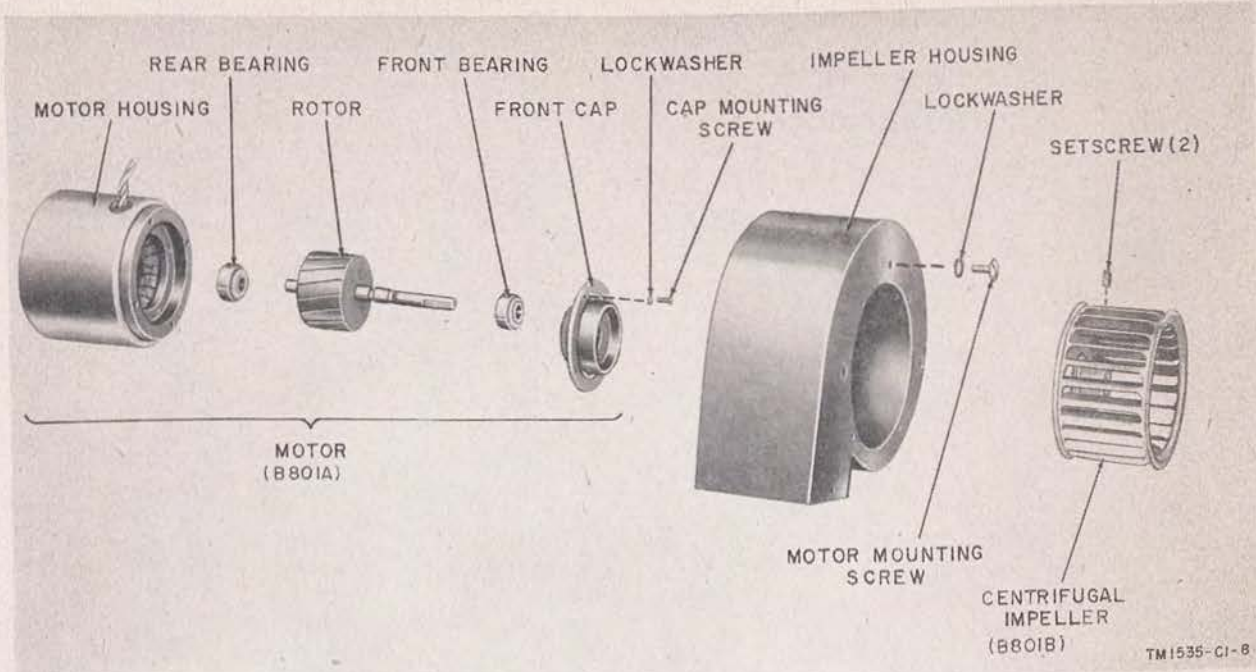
Blower assembly of receiver-transmitters bearing Order No. 28468-Phila-55, exploded view.
